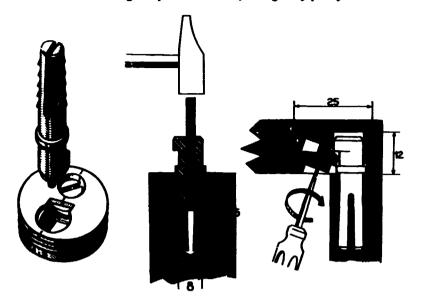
Knock-down fitting for panel furniture, fitting only partly visible after assembly
